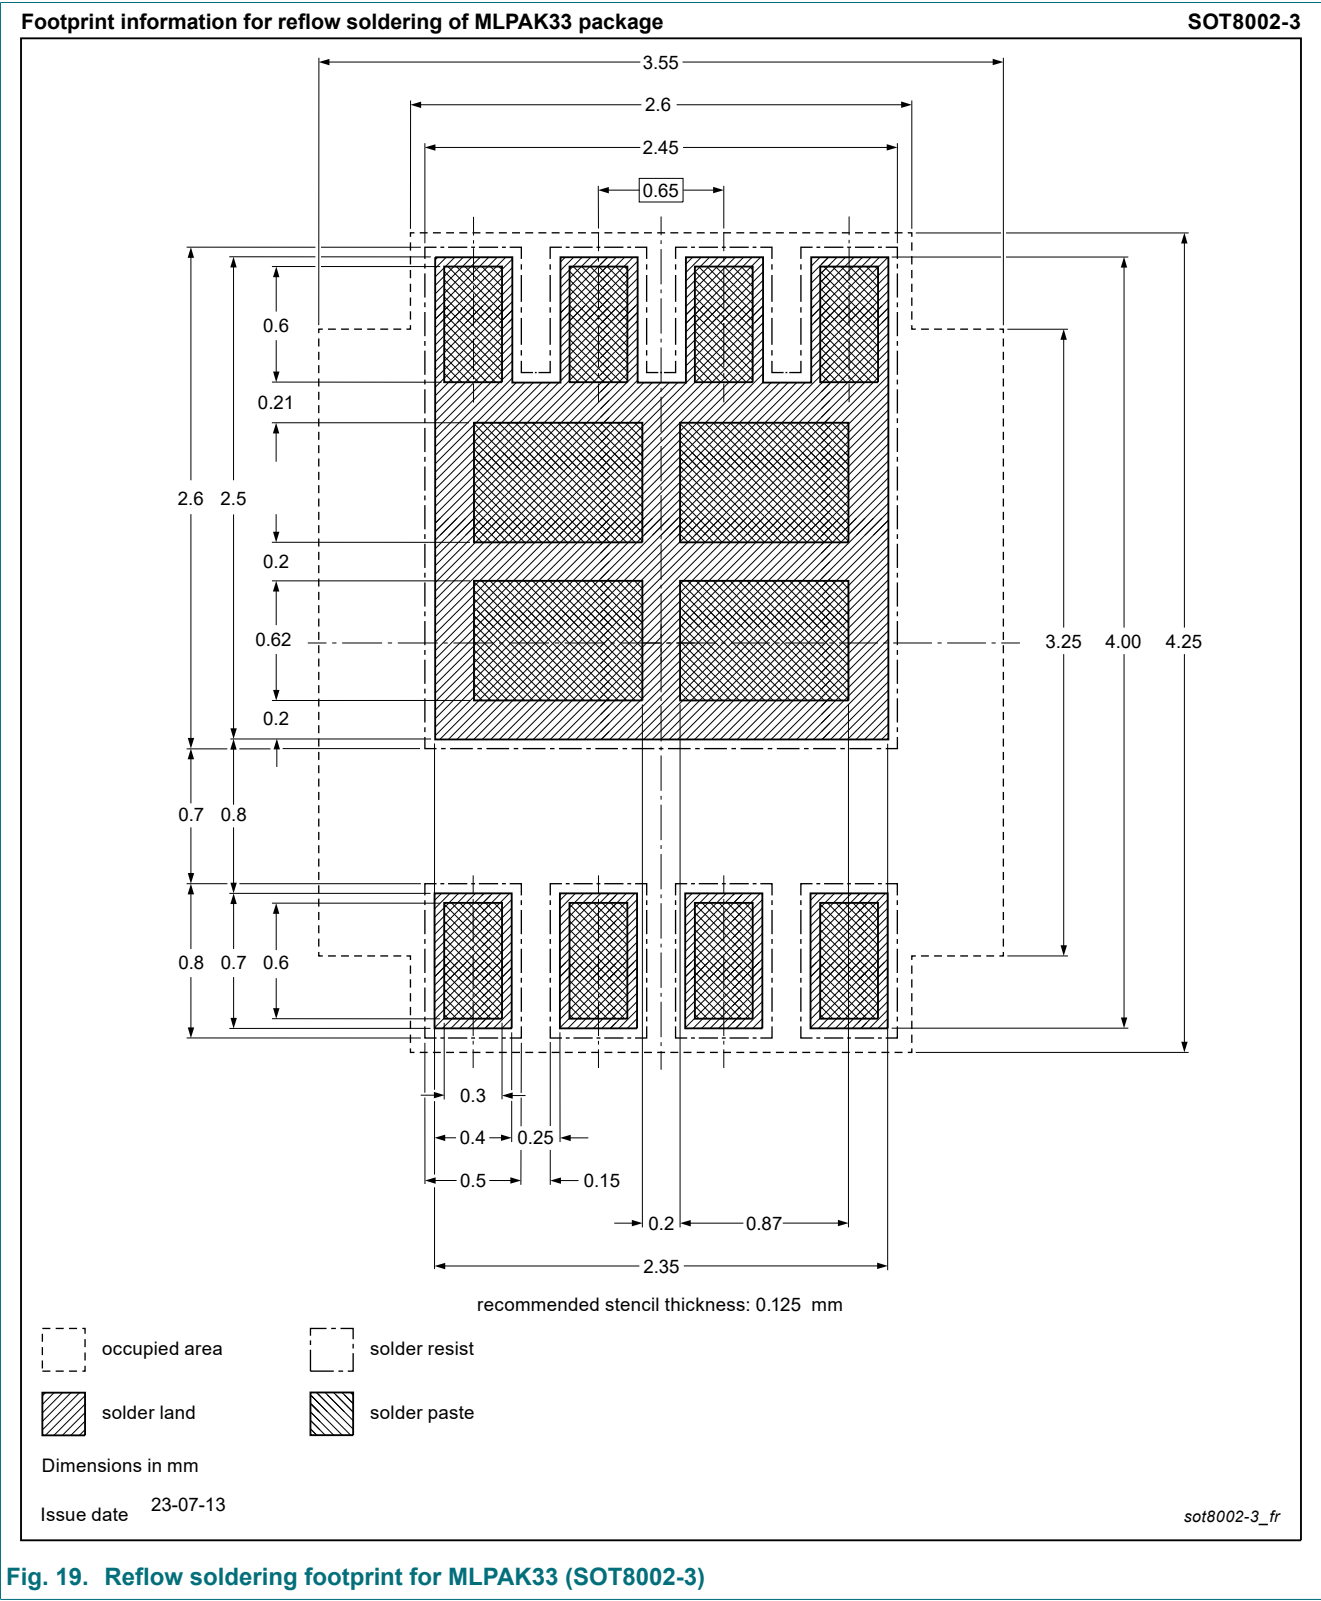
Reflow soldering footprint for MLPAK33 (SOT8002-3)
